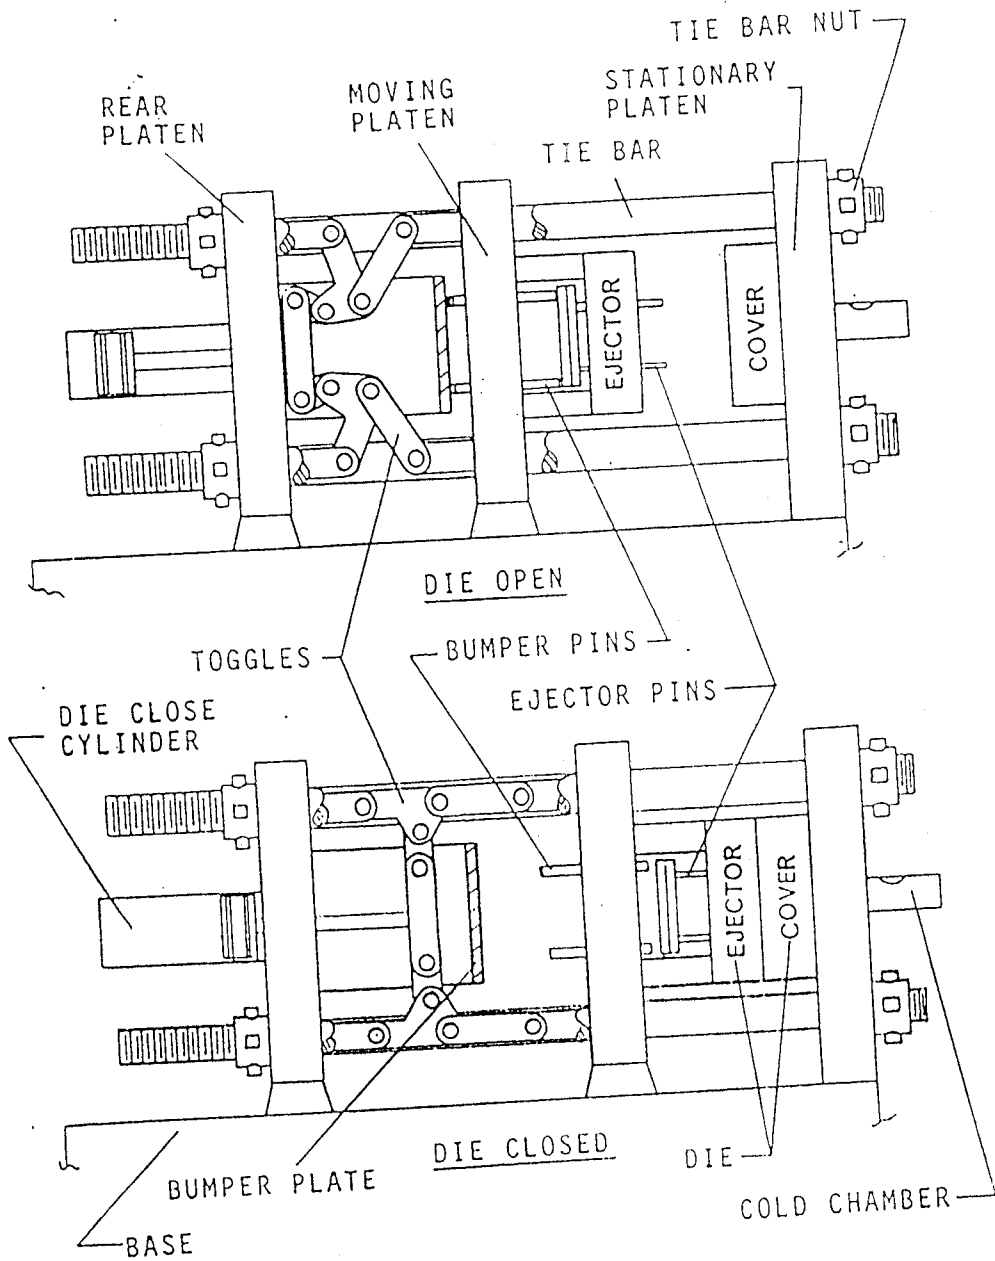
Typical Diecasting machine construction. The hydraulic die closing cylinder straightens the toggle links to close the die. This arrangement achieves high die clamping force and rapid die opening and closing action.
